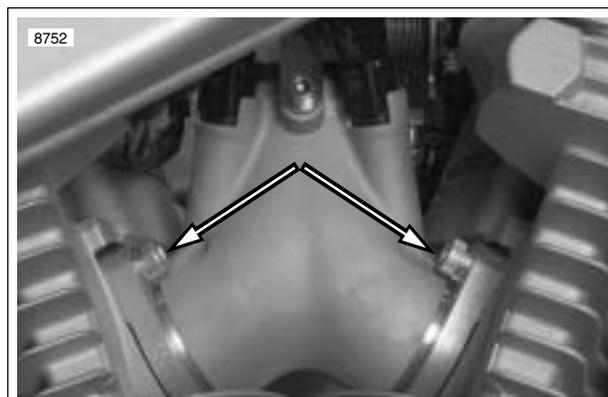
Intake Manifold Fasteners (gearcase cover side)
